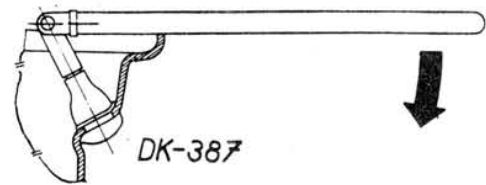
/1 - Pulling Tyre Valve into Wheel Rim
